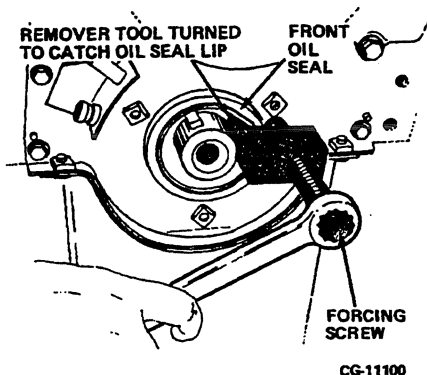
Removing Front Oil Seal Using Locally Made Tool
